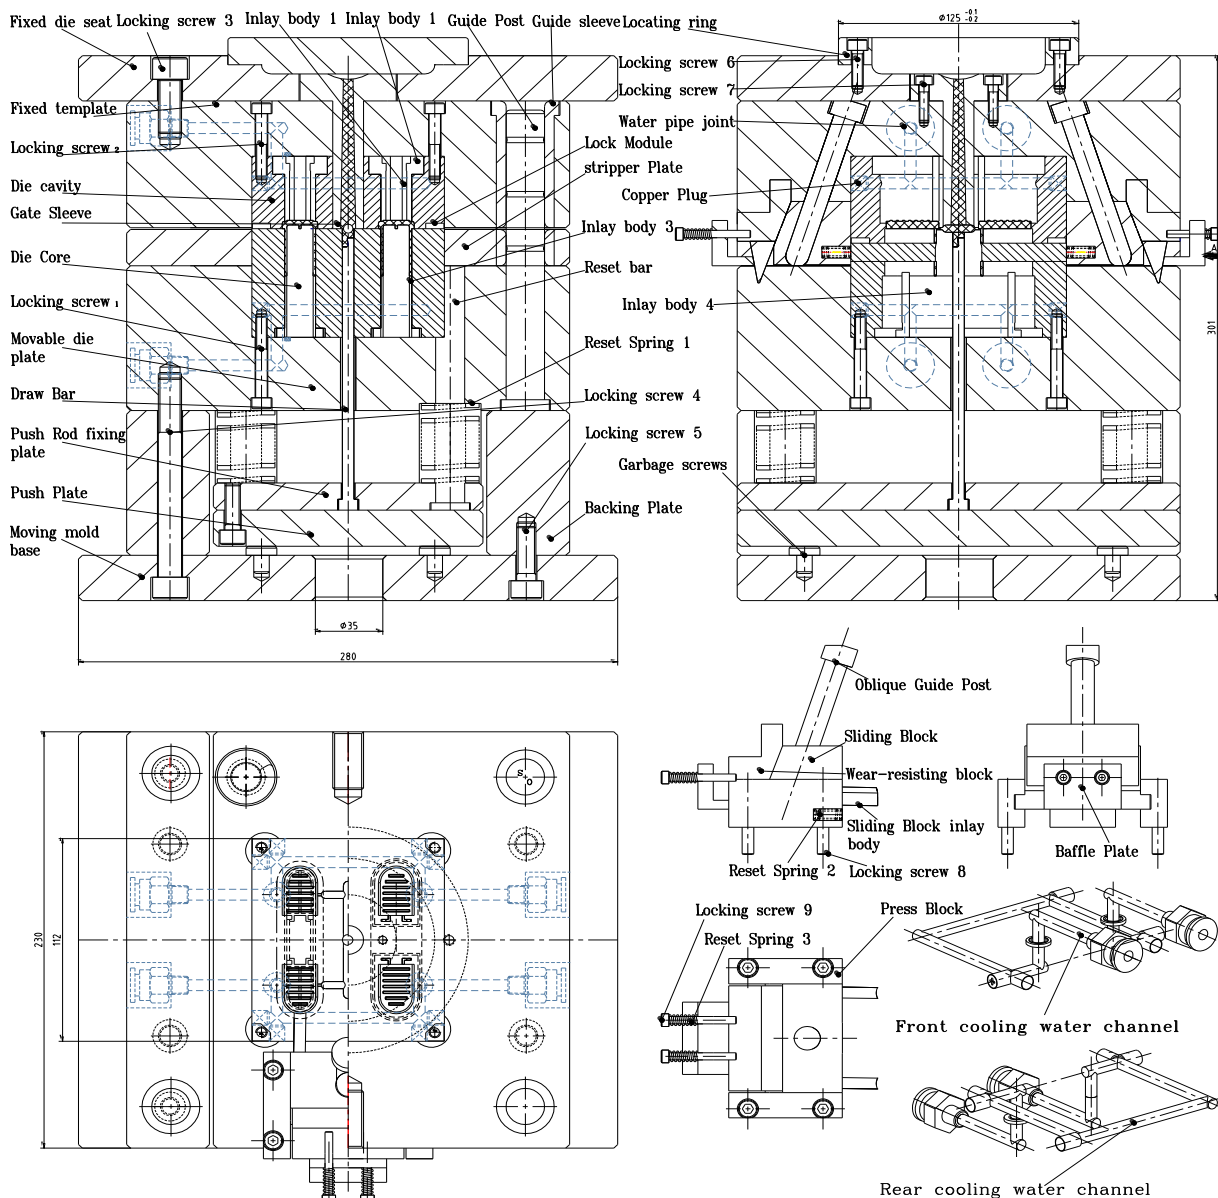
Assembly drawing of a forming die for the lid of a medical instrument
